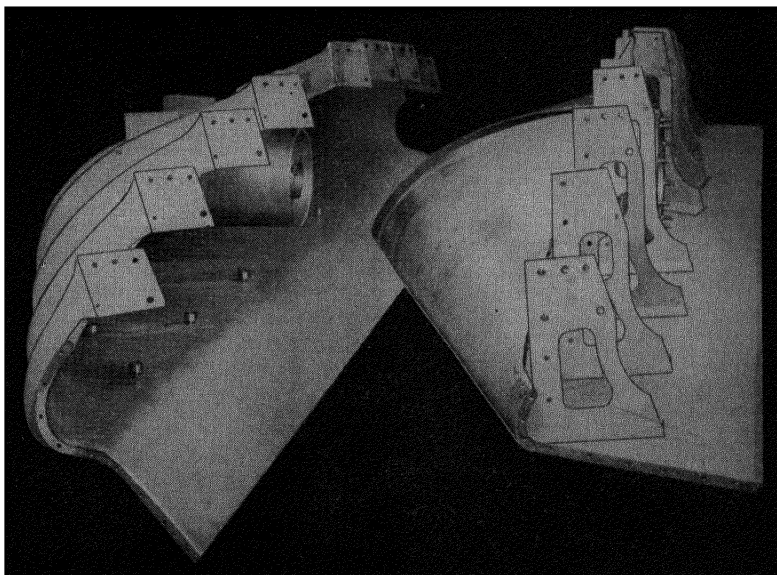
Assembly of the inner and outer surfaces of the Robinson scanning feed.
